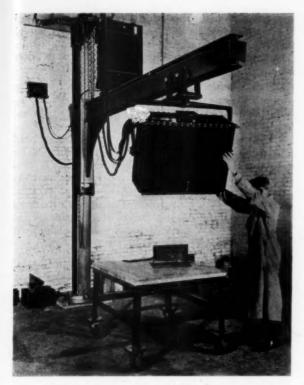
This is a 250 kv x-ray type unit on jib crane. Entire high voltage system and tube are enclosed in one oil-filled housing. Water cooler is mounted on wall. Control panel is outside of exposure room. Jib crane mounting provides easy manipulation of tube for a variety of jobs.
